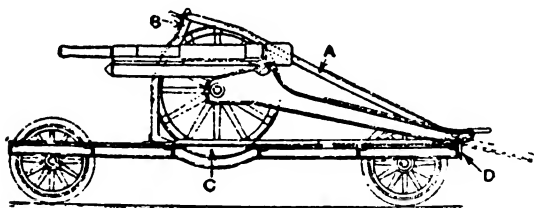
Krupp motor gun carriage, with gun in position of limber
